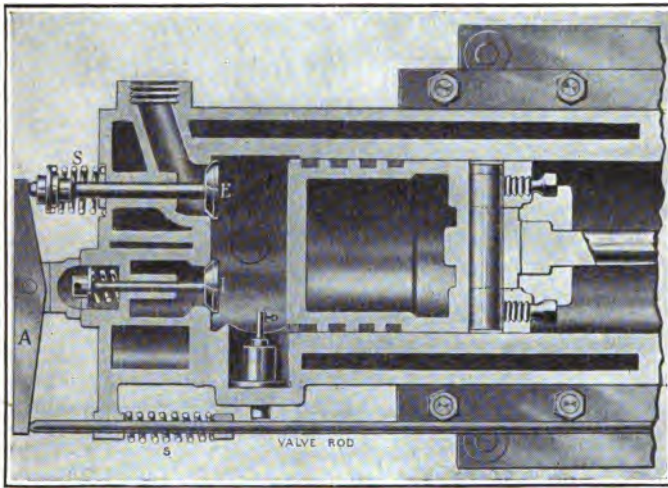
INLET AND EXHAUST VALVES; EXHAUST-VALVE
